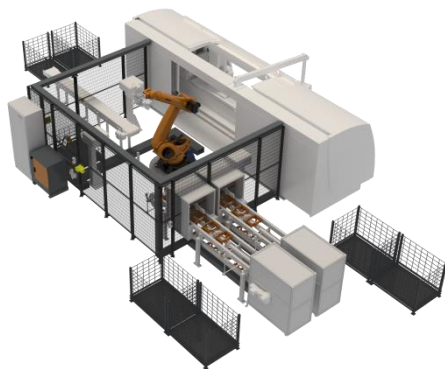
Handling cell with two accumulating conveyors, a hinged chain conveyor and a removal option for reject containers
